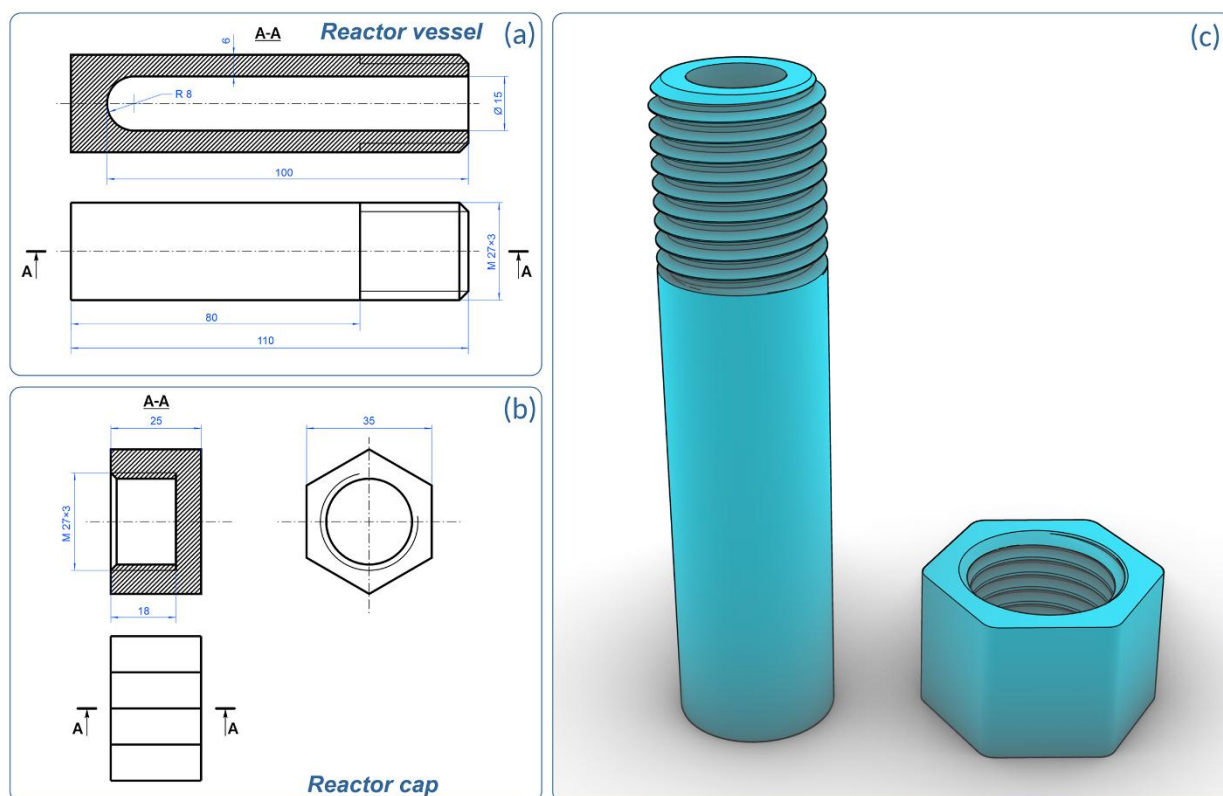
(a) Drawing of the I-tube type 3 reactor vessel; (b) reactor cap drawing; (c) general view of the I-tube type 2 reactor model.
